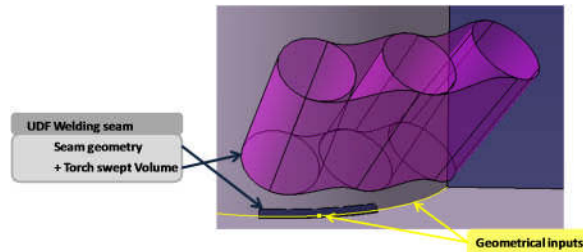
Example of a UDF for 3D welding seam representations.
